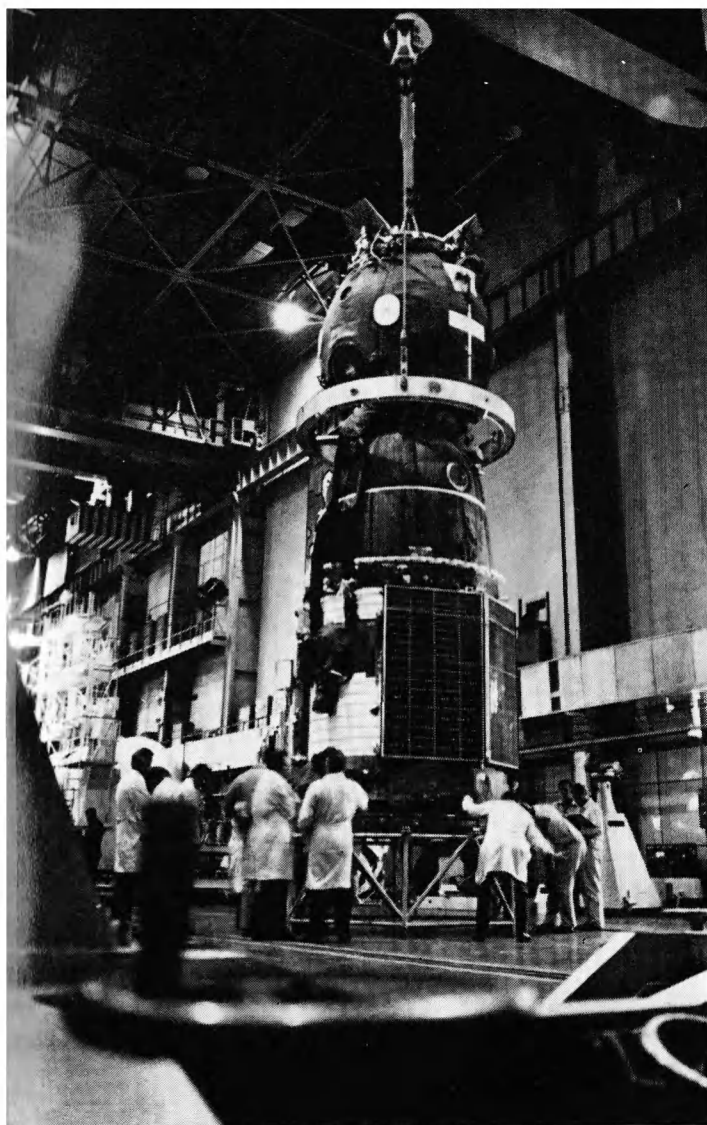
The "Soyuz" spaceship in the assembly-and-test building (ATB)
